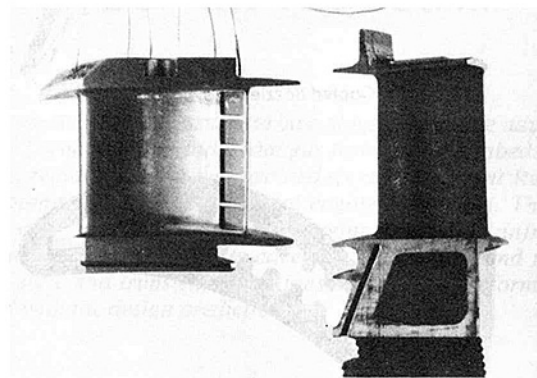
NGV and rotor blade (showing NGV thermocouples)
